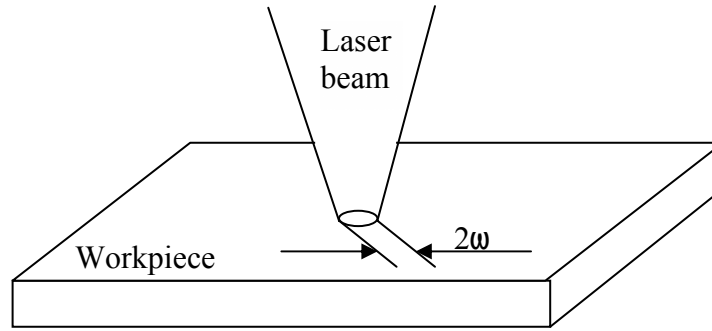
Laser beam impinging on a workpiece of a finite size.
